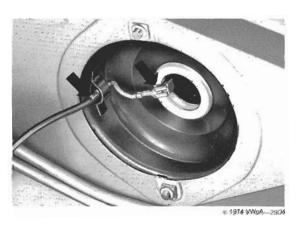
Horn ground wire (steering column and coupling removed for clarity). The wire passes through a retainer on the cover plate (left arrow). The terminal on the column tube (right arrow) must be bent to one side as shown when the column tube is installed.
